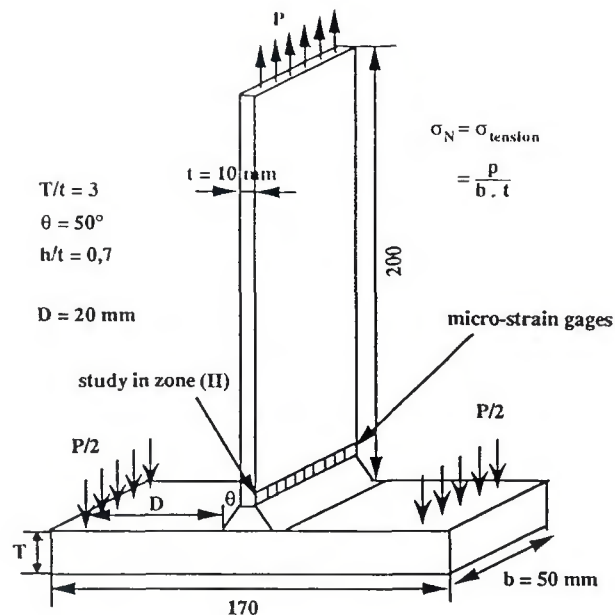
Schematic of weld assembly showing the placement of strain gauges for study of Zone II.
